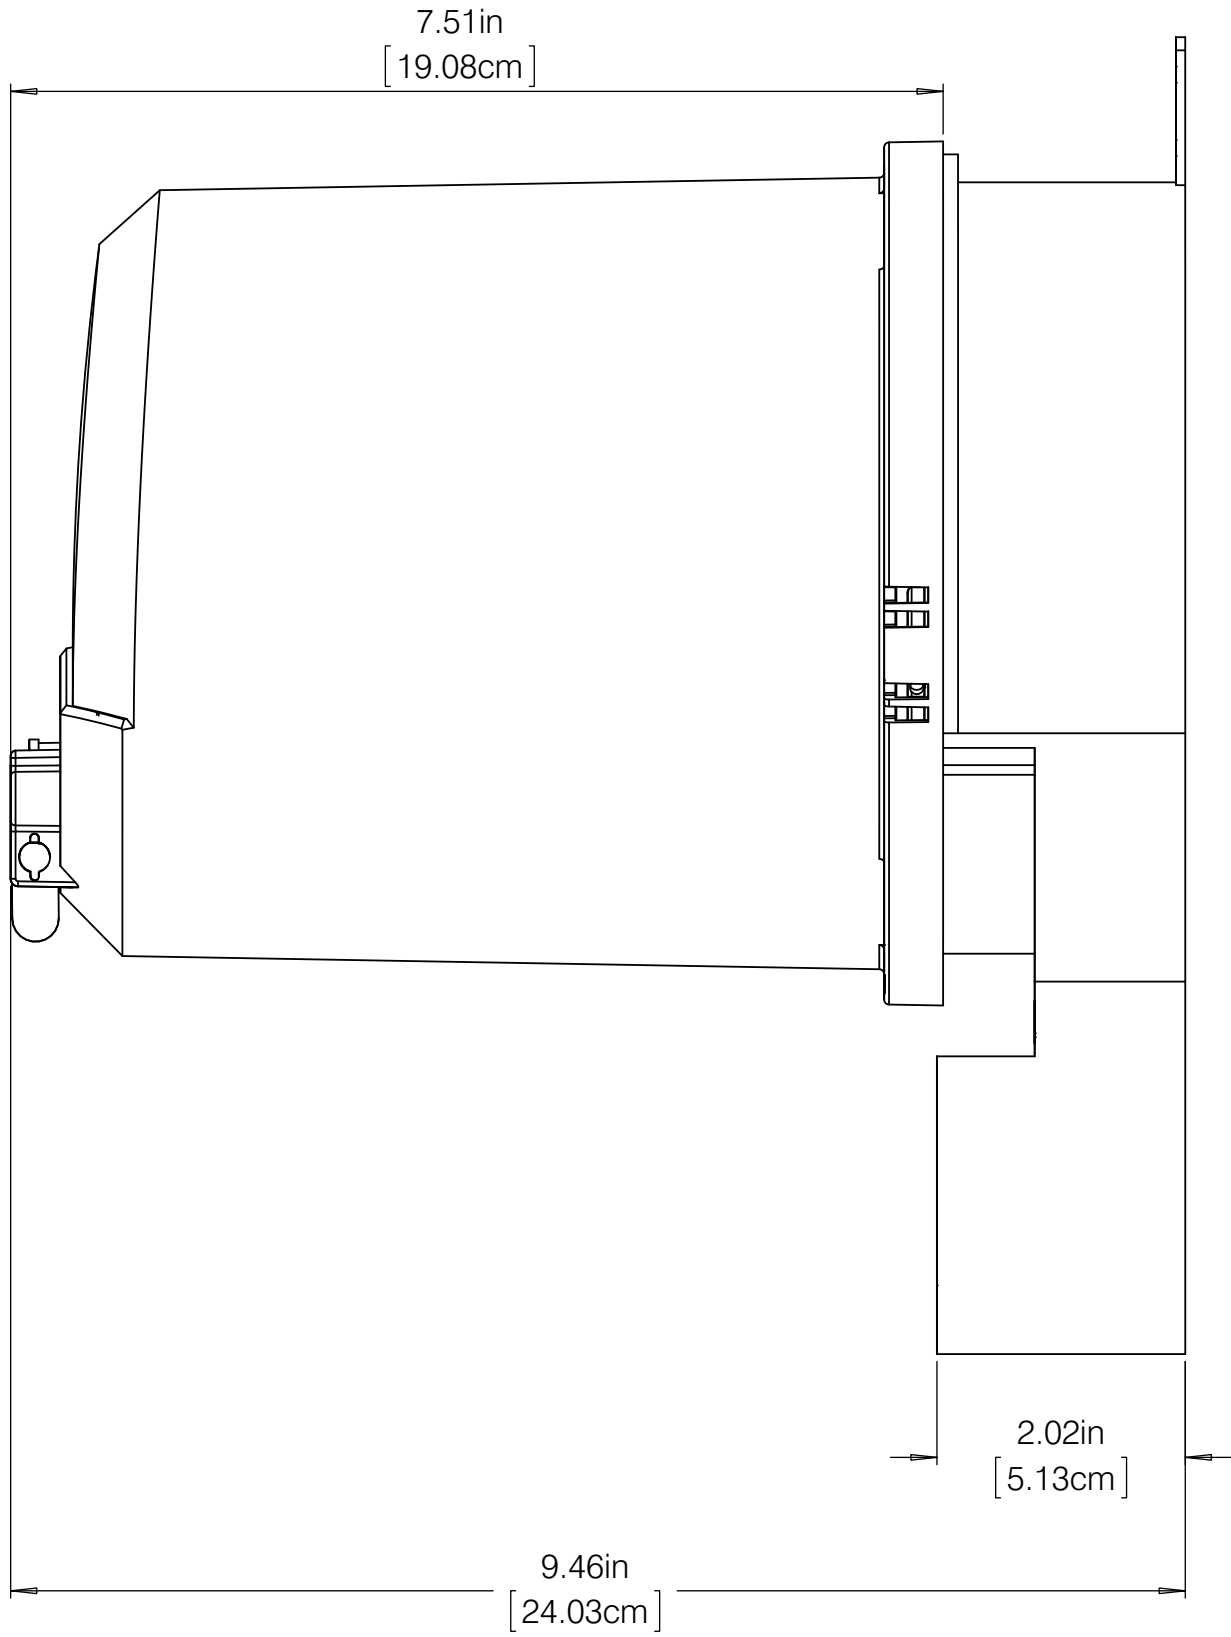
Socket Meter Mounted in S to A-Base Adapter Side Dimensions
